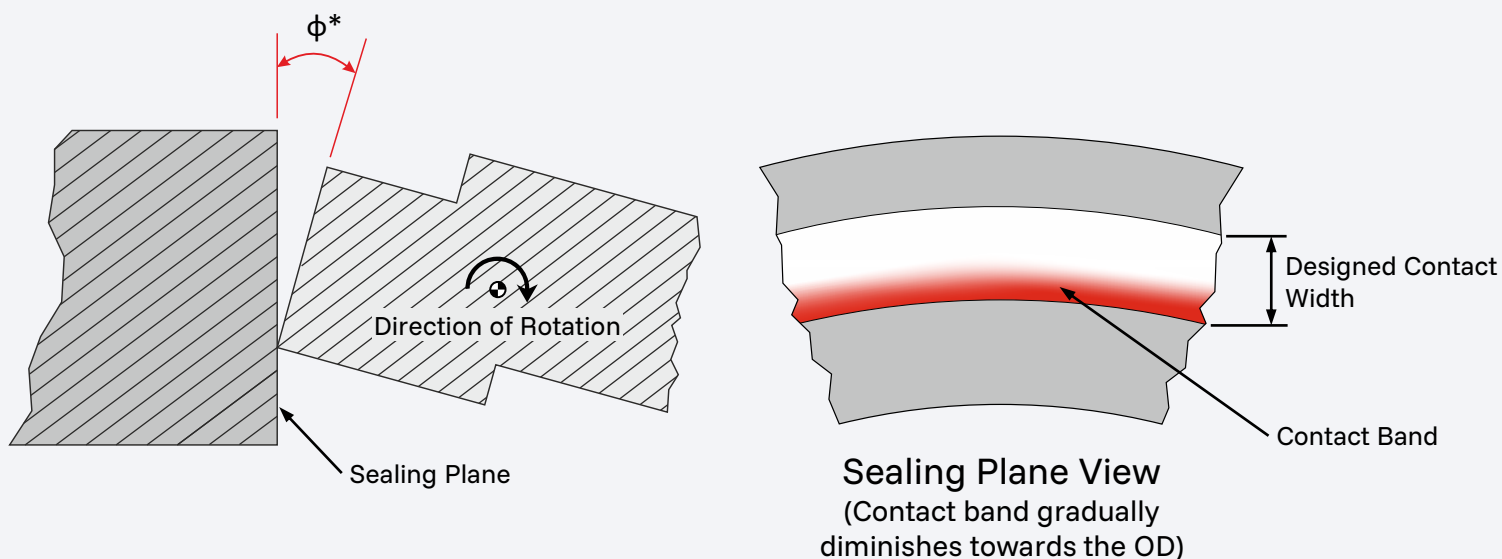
Illustration of Angular Rotation and Sealing Plane View
